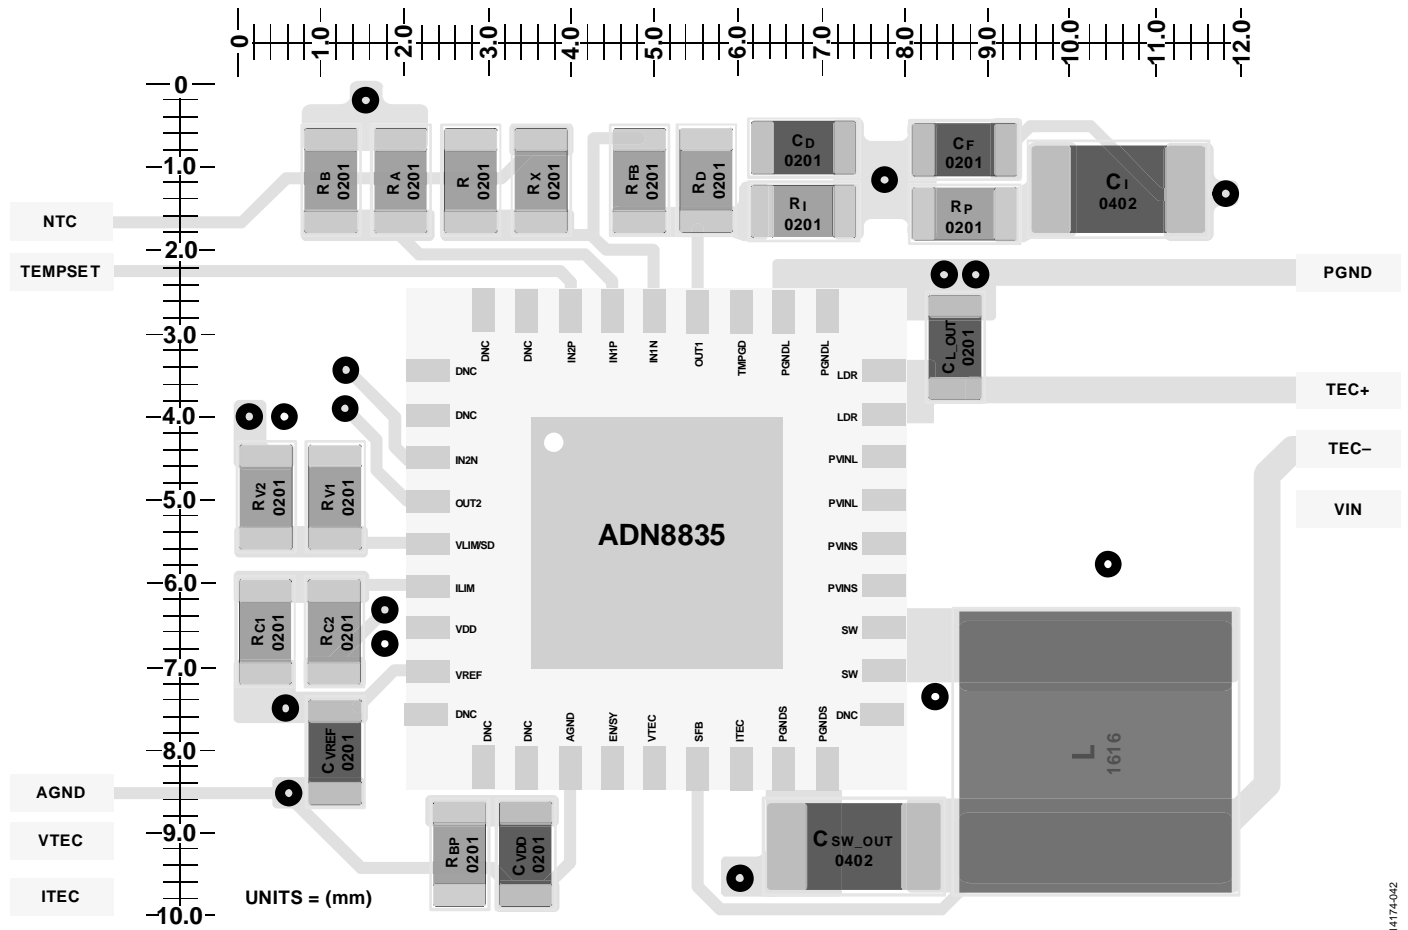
Example PCB Layout Using Two Layers (Top Layer Only)
